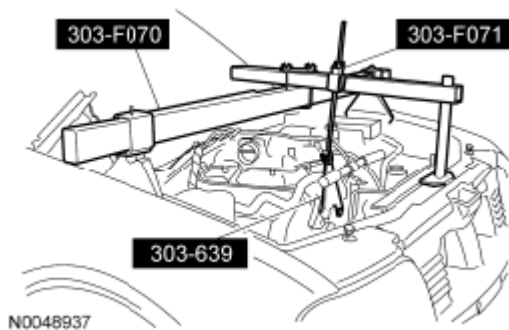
Installing Engine Support Bar, Support Hook And Engine Support Bracket
